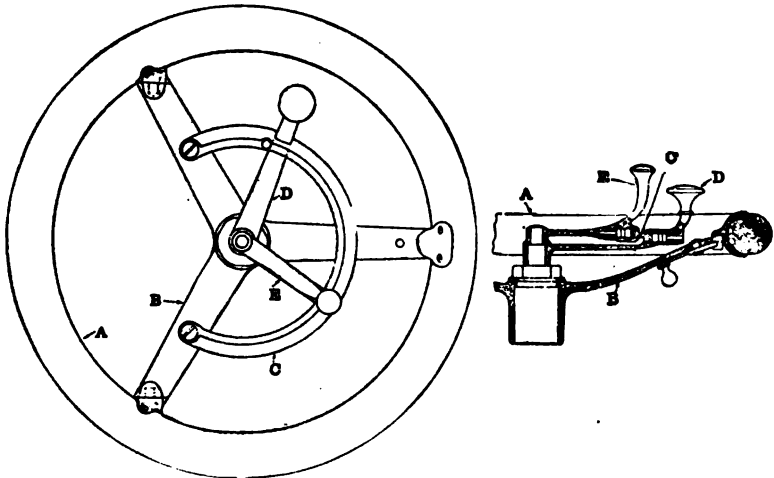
Steering Wheel and Attachments of the Pope-Toledo Carriage. A is the wheel rim; B, a spoke or arm of the three-armed spider; C, sector for sliding arms, D and E; D, throttling arm and handle; E, spark regulating handle.
